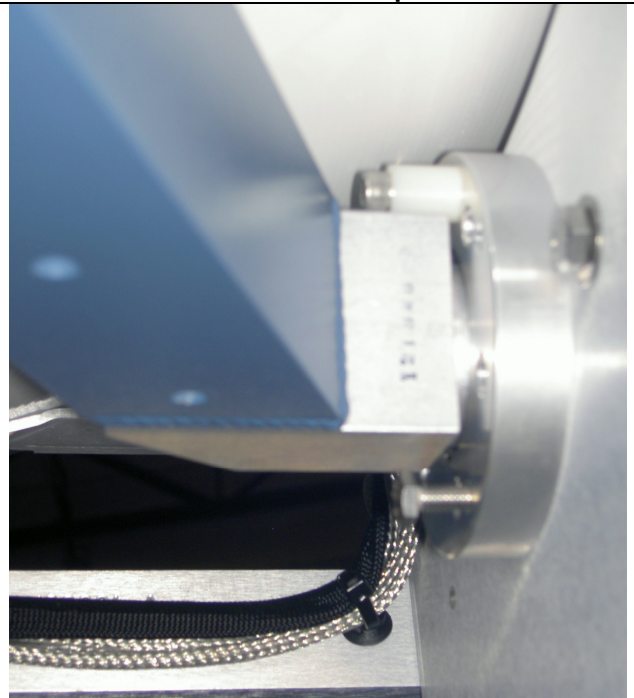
Left Elevation Bearing on High Elevation Stop
